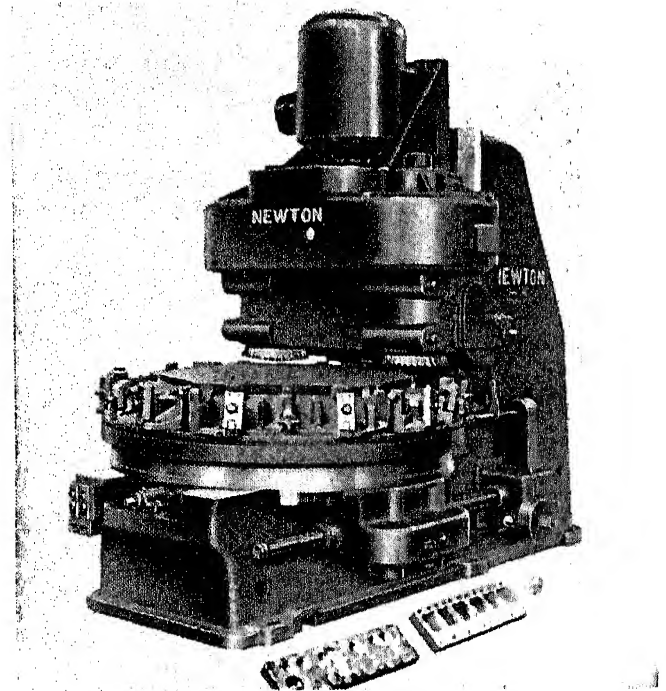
A 76 in. vertical rotary miller. (Courtesy Consolidated Machine Tool Corp.)
